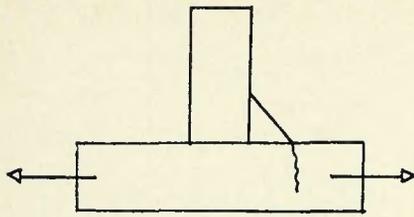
Non-load bearing fillet weld. Fatigue failure through plate initiated at toe of weld. Porosity has no effect on fatigue strength
